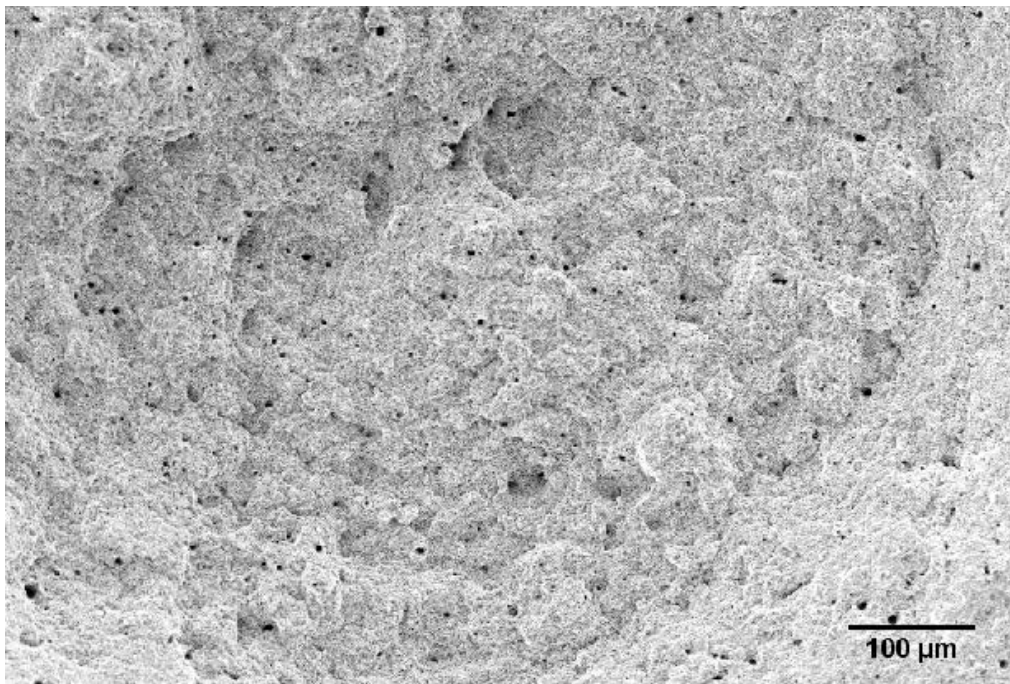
Fracture surface of Seamless L80-Mo steel failing in air.
